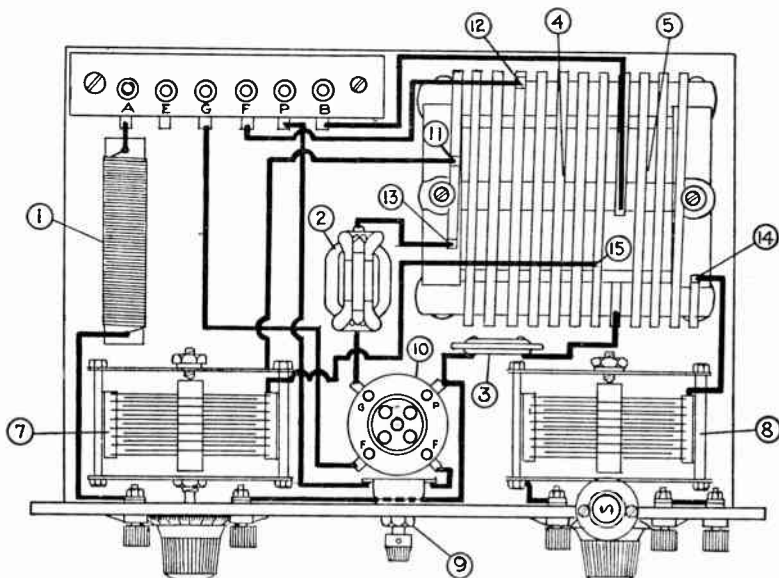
Layout of Apparatus for Short Wave Transmitter.
